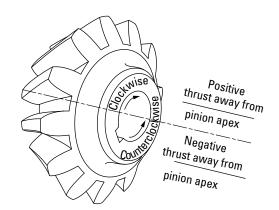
Spiral bevel and hypoid gears the direction of thrust and separating forces depends upon spiral angle, hand of spiral, direction of rotation, and whether the gear is driving or driven.
